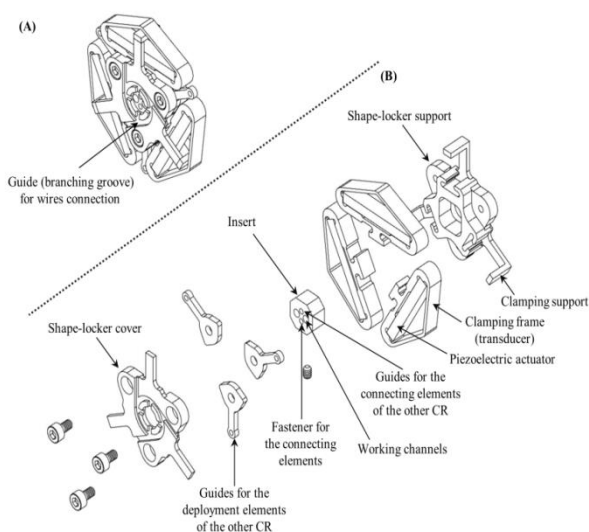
Shape locking element (A) Prospective view (B) exploded view
